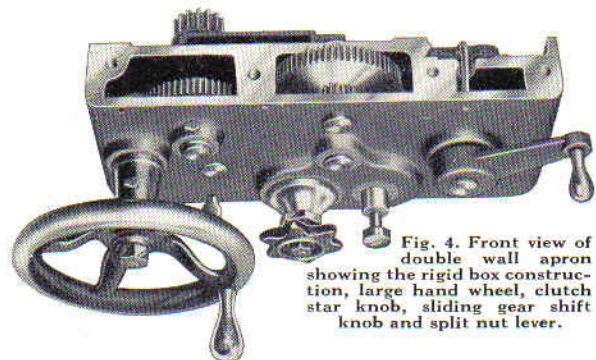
Front view of double wall apron showing the rigid box construction, large hand wheel, clutch star knob, sliding gear shift knob and split nut lever.
